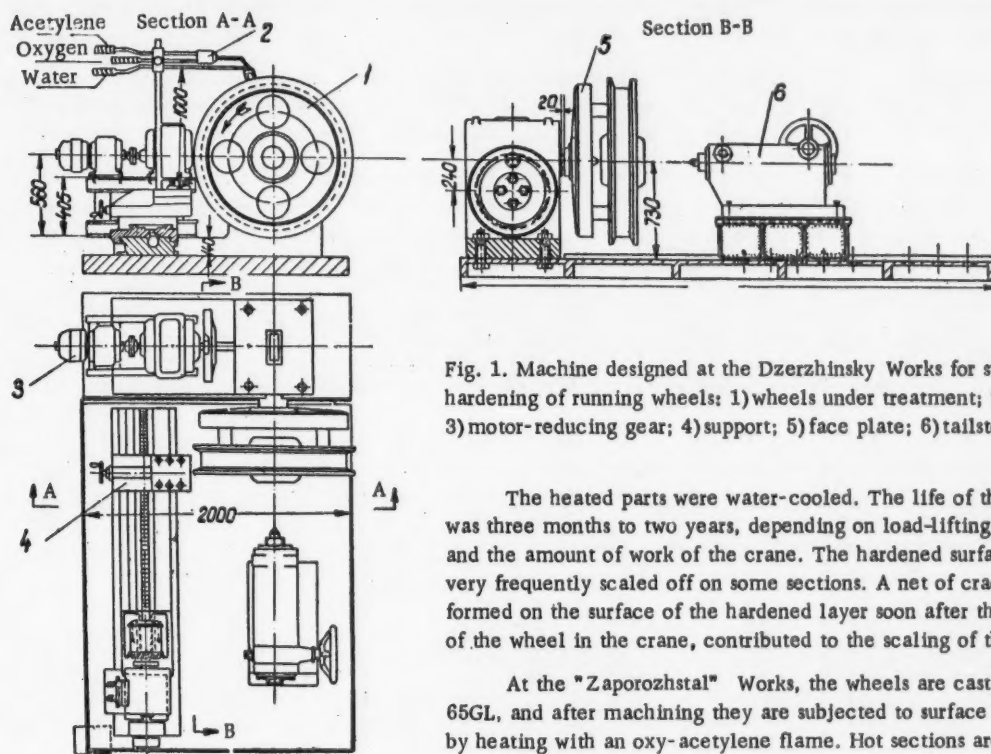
Machine designed at the Dzerzhinsky Works for surface hardening of running wheels: 1) wheels under treatment; 2) torch; 3) motor-reducing gear; 4) support; 5) face plate; 6) tailstock.
